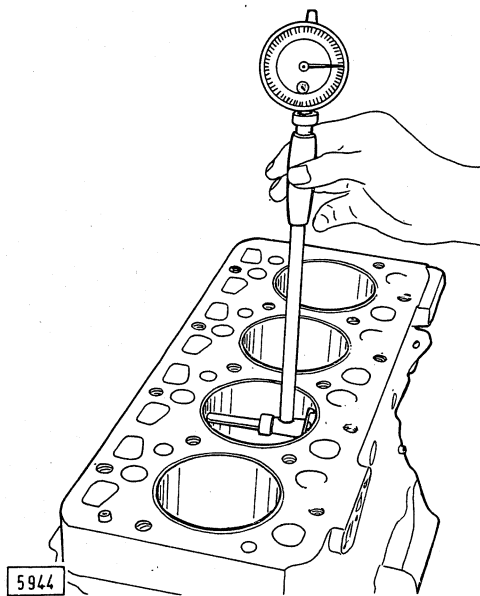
Checking cylinder liner bore with a dial indicator gauge.
